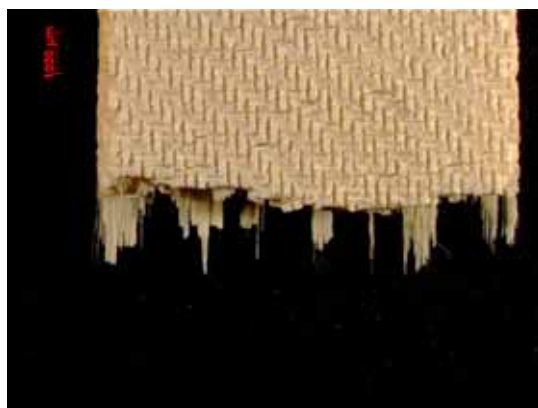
Fracture surface of the N610/LaPO₄/Al₂O₃ specimen with 8ply HSW subjected tension to failure in laboratory air at 1100 °C.
